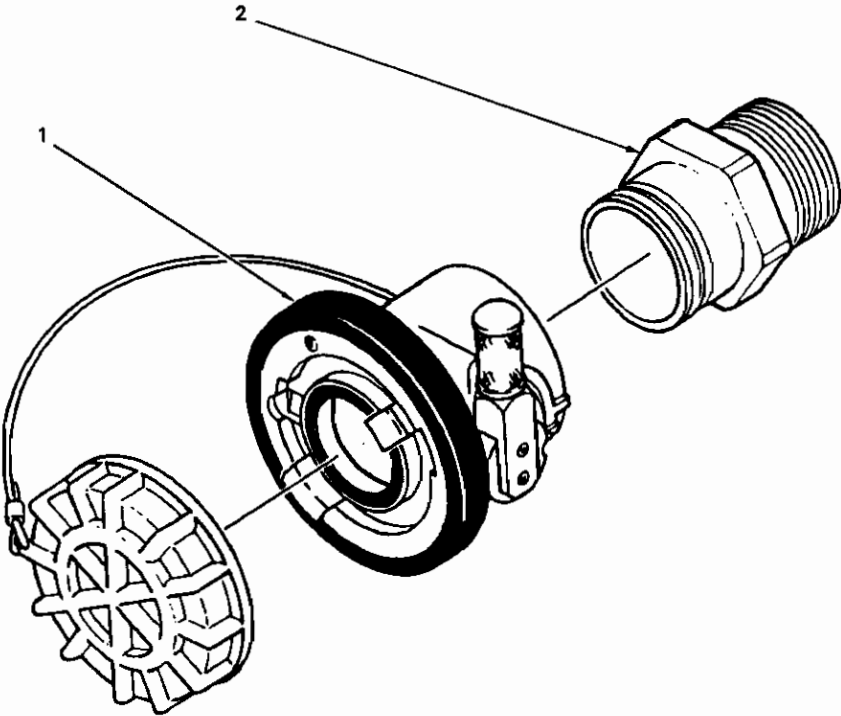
Coupling, Unisex, Valved, 2-Inch, Male NPT Inlet
